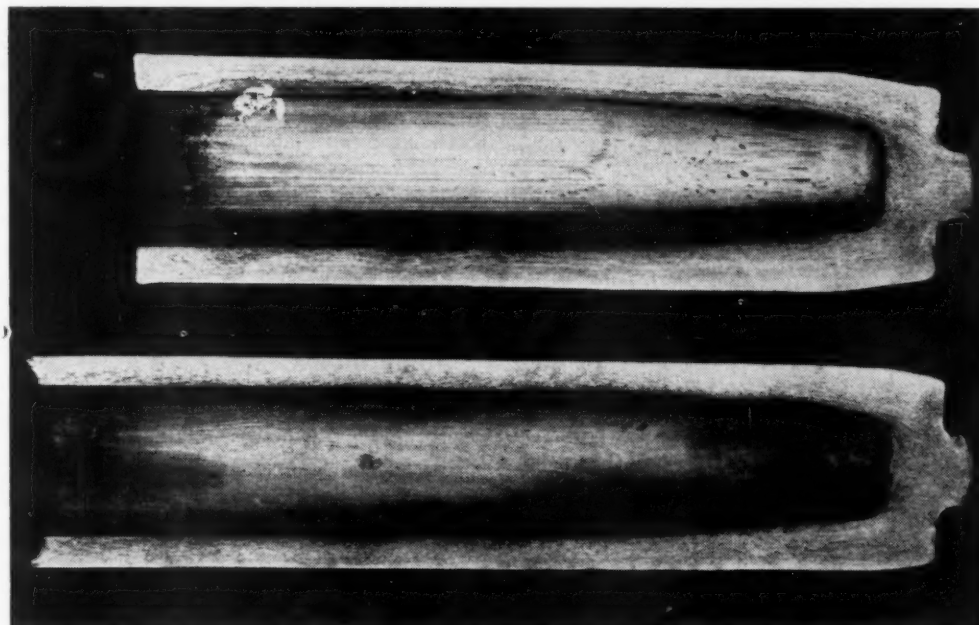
75-MM SHELL BEFORE AND AFTER CORRECTION FOR ECCENTRICITY IN FINISHING MILL
